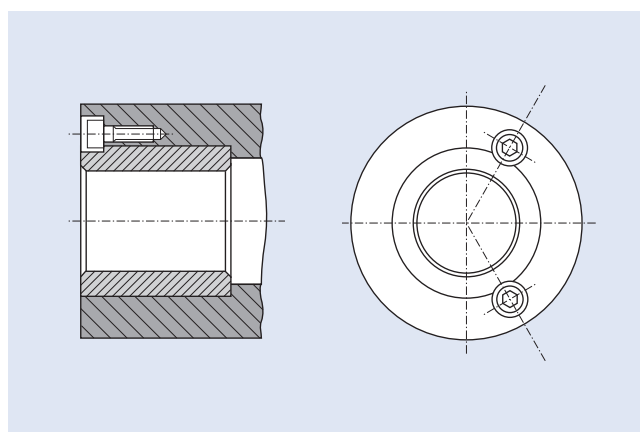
Mechanical fixation of deva.metal® bushings
